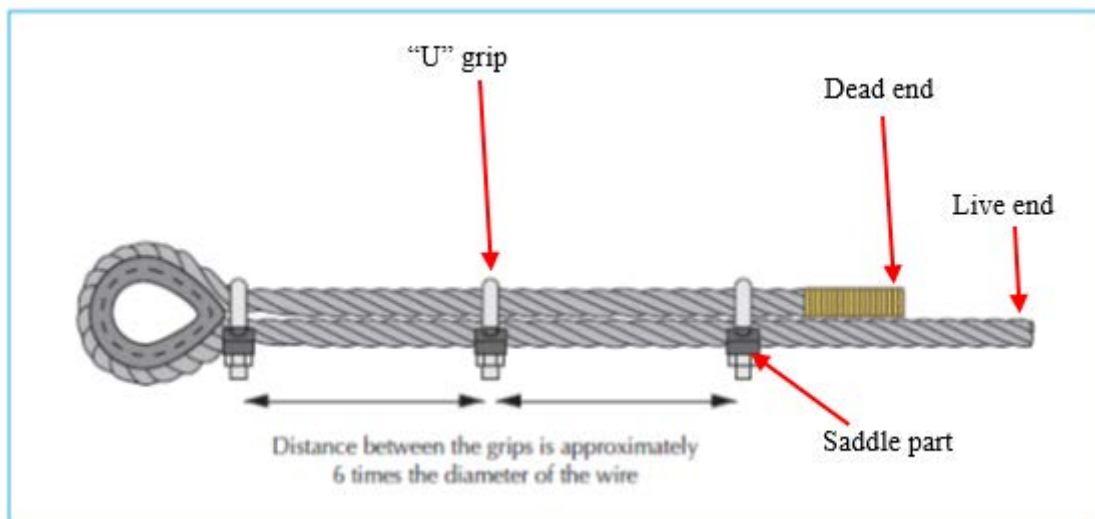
Typical wire assembly forming an "eye" using bulldog grip
